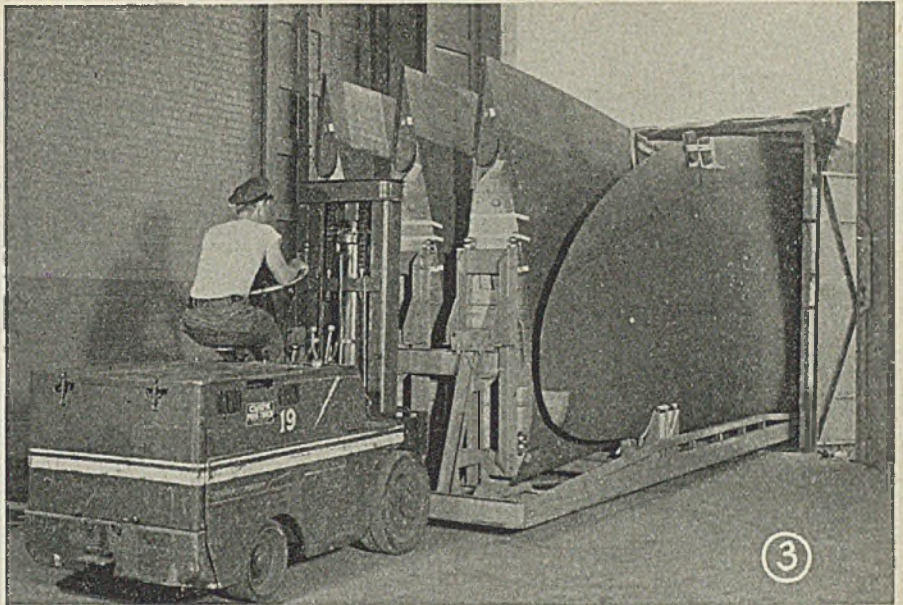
Completed wing sections held in special skid mount of welded structural steel is being moved into open end of freight car
